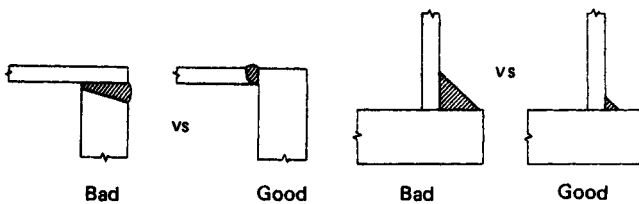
Size of weld should be determined with reference to thinner member. (*The Lincoln Electric Company.*)
